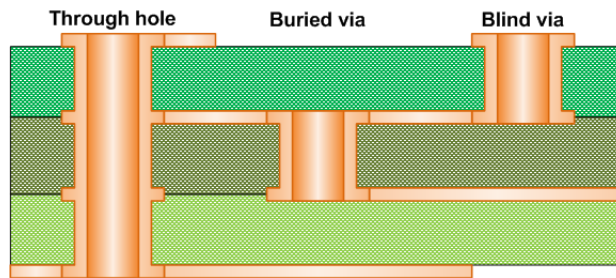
Different types of vias shown in a cross-sectional view of a multi-layer board [91].
